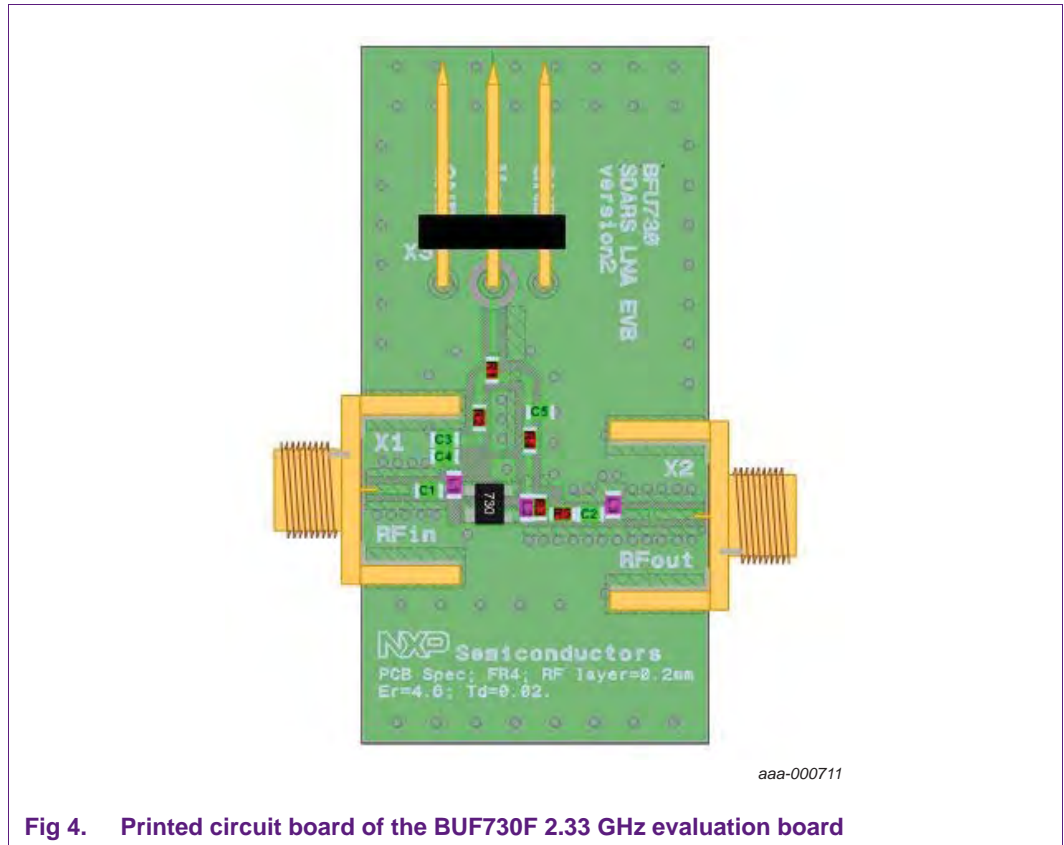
Printed circuit board of the BFU730F 2.33 GHz evaluation board
